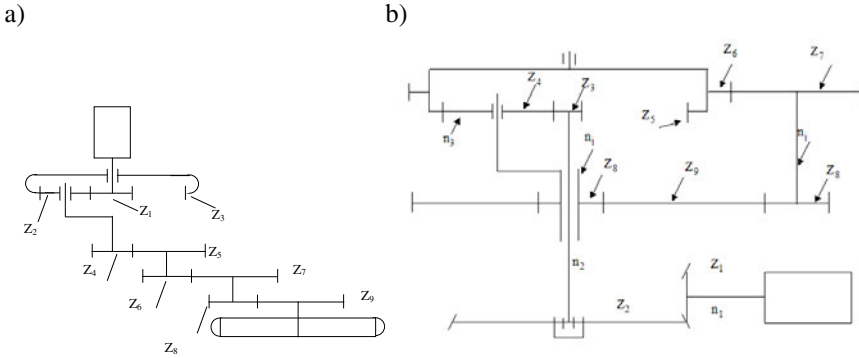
a) and b) Schemes of complex system of gearboxes which can be reduced into compound gear systems
